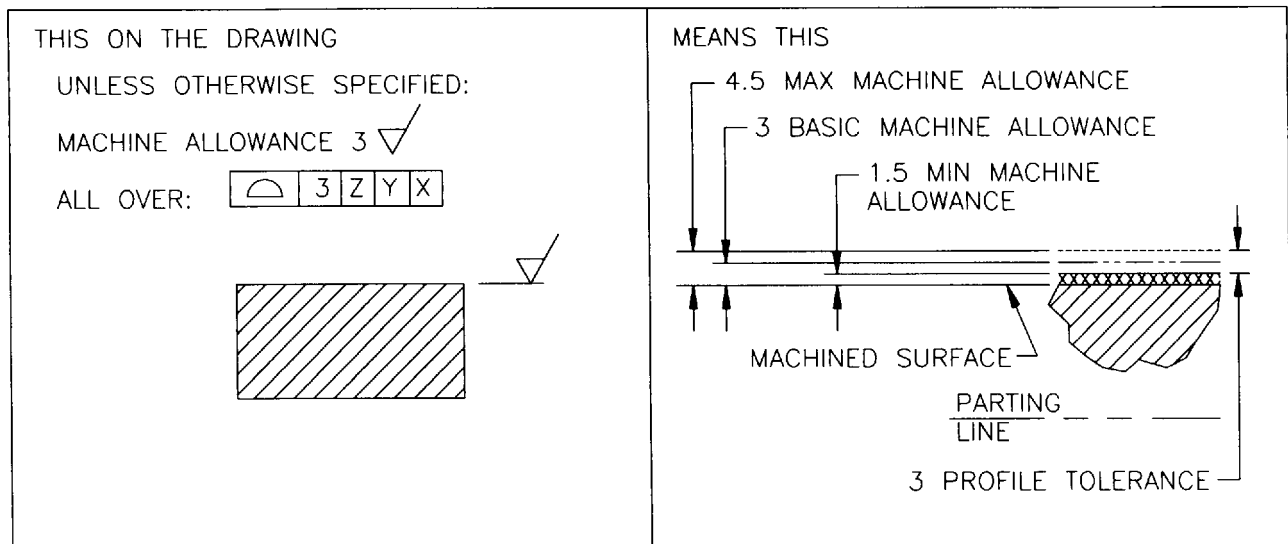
MACHINE ALLOWANCE — SURFACE WITHOUT DRAFT
